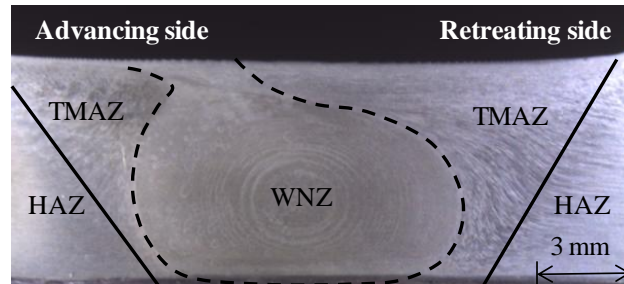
A typical macrograph showing the various zones in the transverse cross-section of the weld region of the FSW joint.
